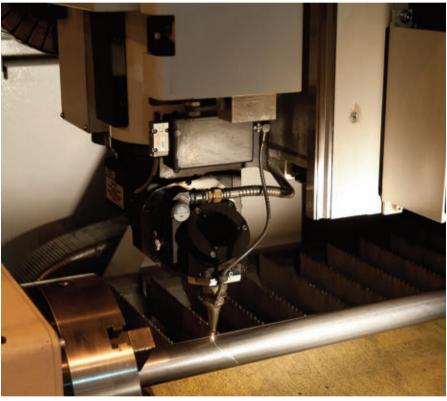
The laser cutting machine holds tolerances that are similar to those associated with machining centers, according to SE&M officials.
